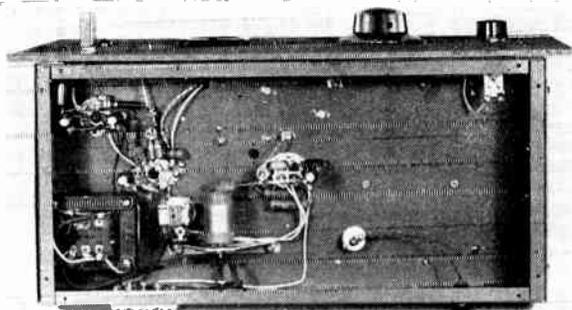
Bottom view of the 160-meter transmitter. The oscillator tube socket and its related parts are in the upper left corner. The 6L6 and the final-amplifier tube are mounted in a line through the center of the chassis, with the plate coil for the 6L6 supported on a bracket between the two stages. The parasitic-suppressing choke is mounted between the grid terminal of the amplifier socket and a ceramic stand-off insulator.
